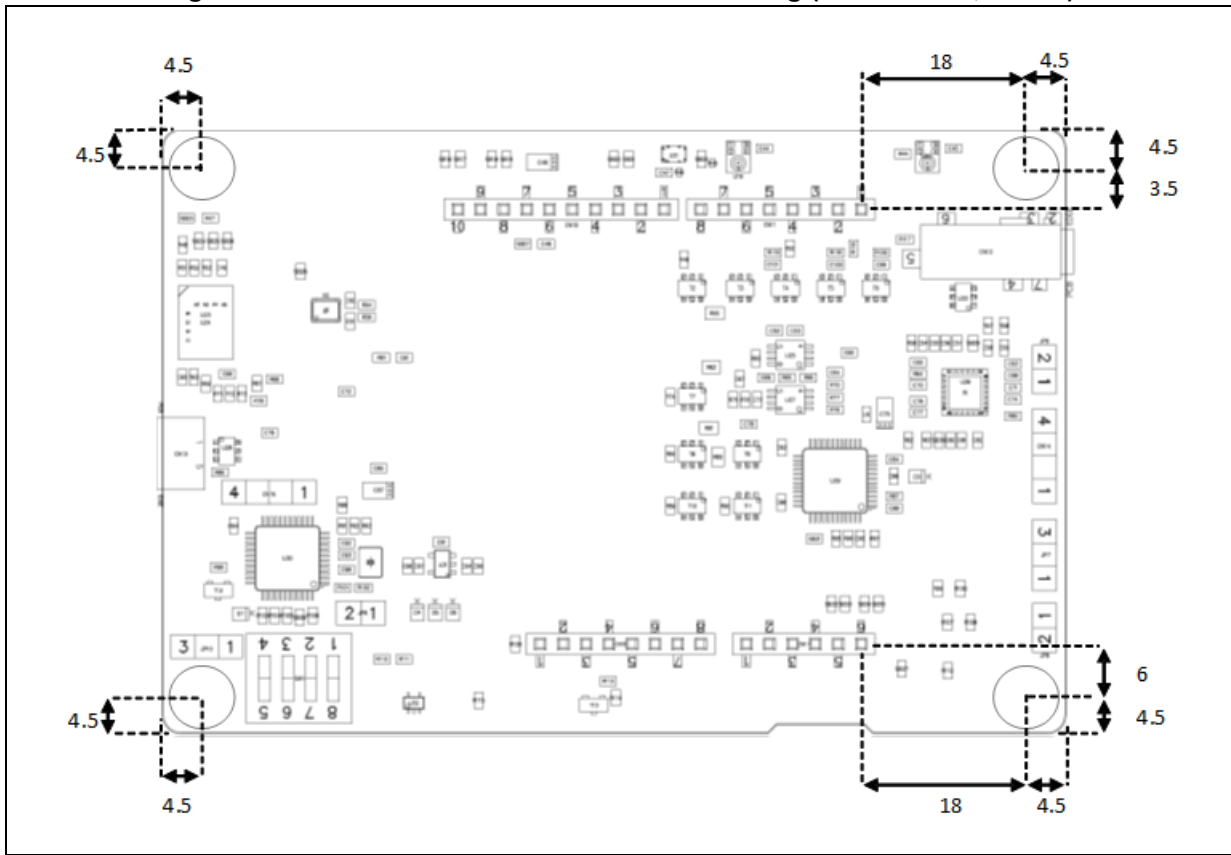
32L4R9IDISCOVERY mechanical drawing (bottom view, in mm)
